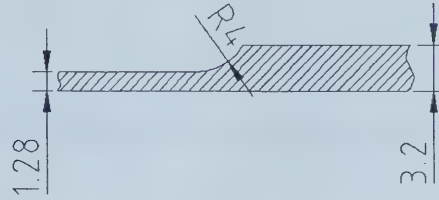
Cross-sectional view of reduced thickness (unit: mm)
